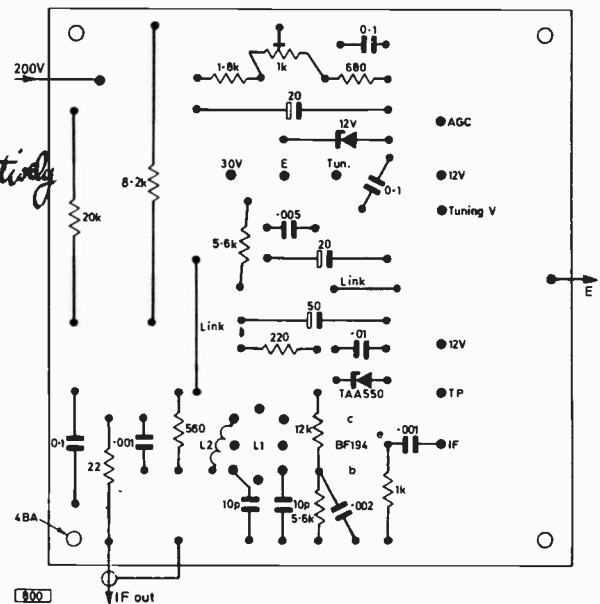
Printed board layout for the varicap tuner plus i.f. preamplifier circuit. Connect E to the receiver chassis with heavy-gauge wire.
